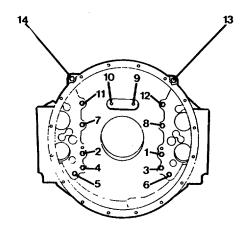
Flywheel Housing Bolt Tightening Sequence.
